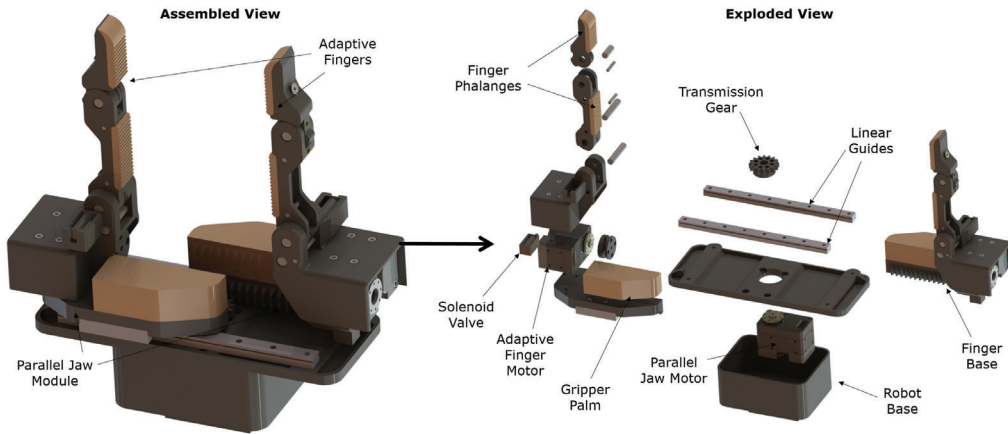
The assembled and exploded views of the proposed multi-modal robotic gripper.
